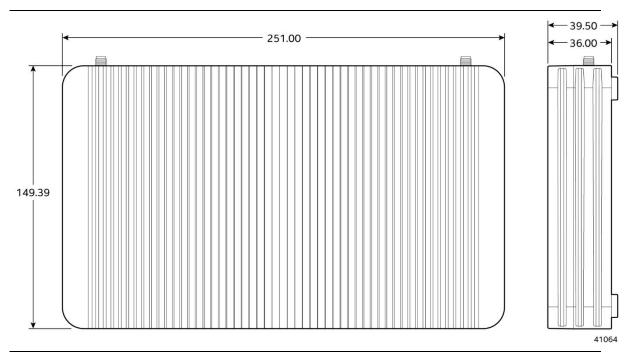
CMCR1ABA, CMB1ABB and CMCR1ABC Dimensions
